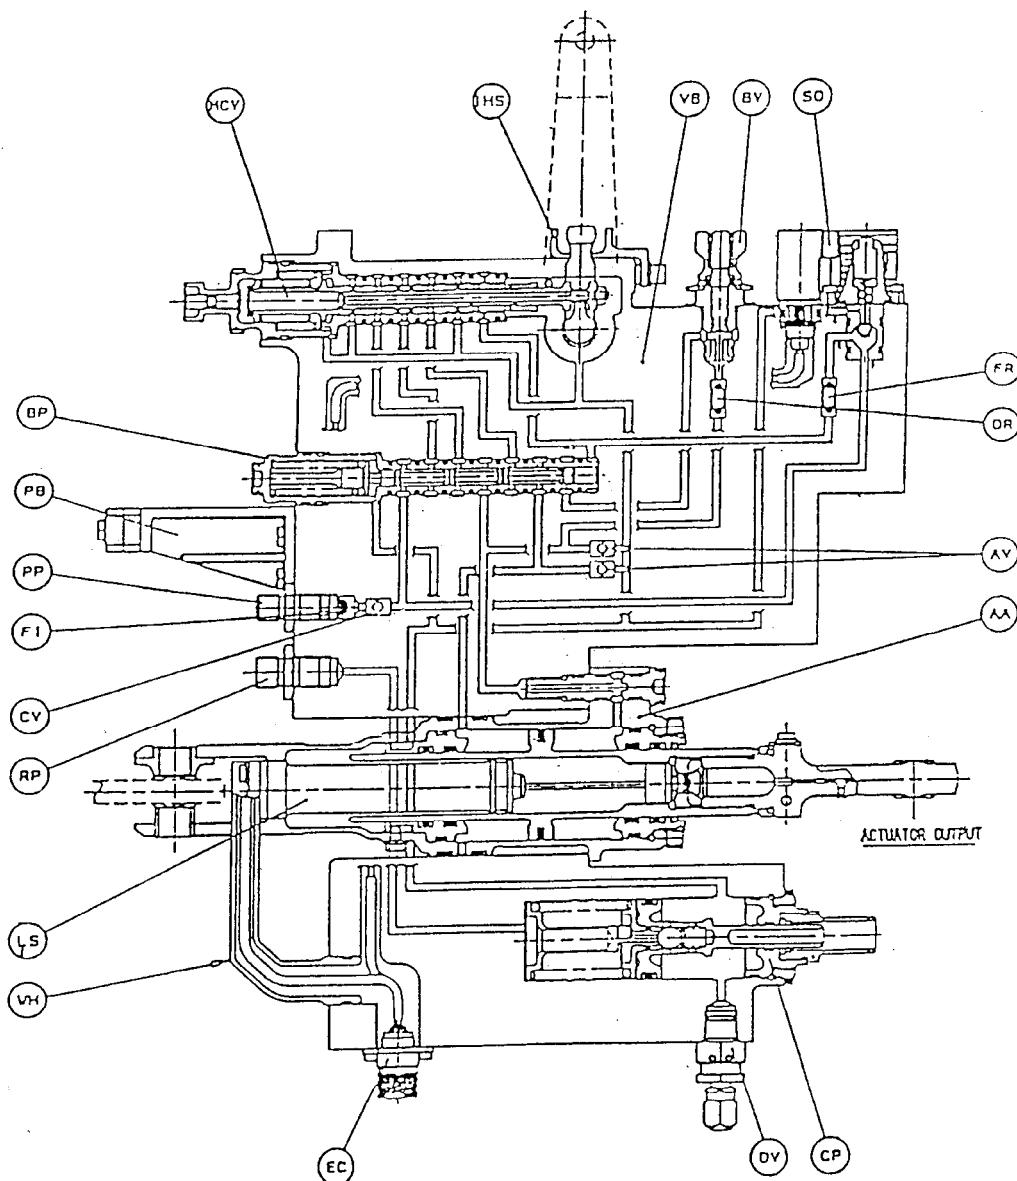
N-250 INBOARD AILERON HYDROMECHANICAL ACTUATOR
